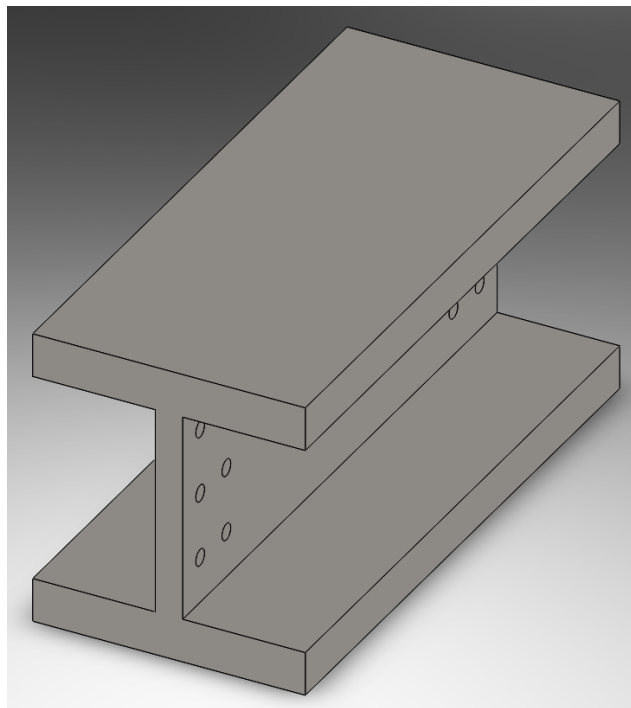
Bracket created with Extrusion tools, Rib tools, and Linear Pattern tools
